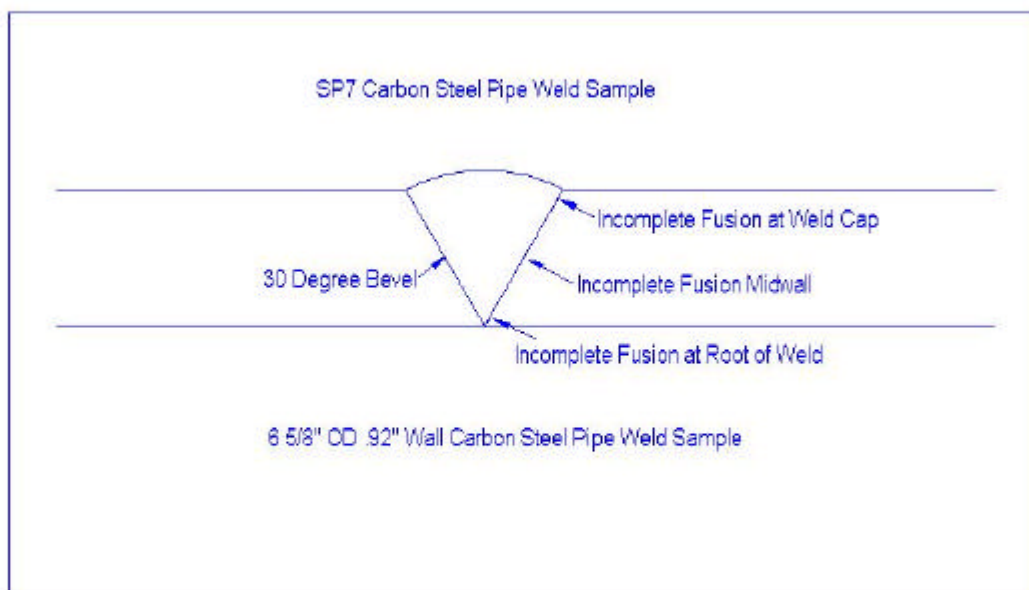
6.5" OD .91" Wall Carbon Steel Weld Sample
